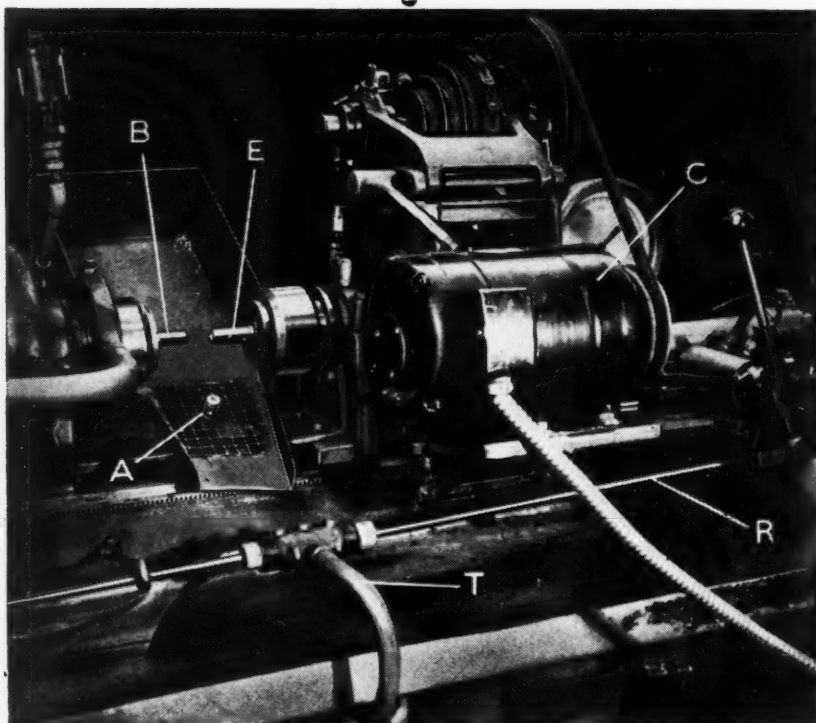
Lathe Set-up for Simultaneously Chamfering Both Ends of Cylindrical Parts. The Set-up Consists Principally of an Auxiliary Headstock Installed on the Right-hand End of the Lathe
